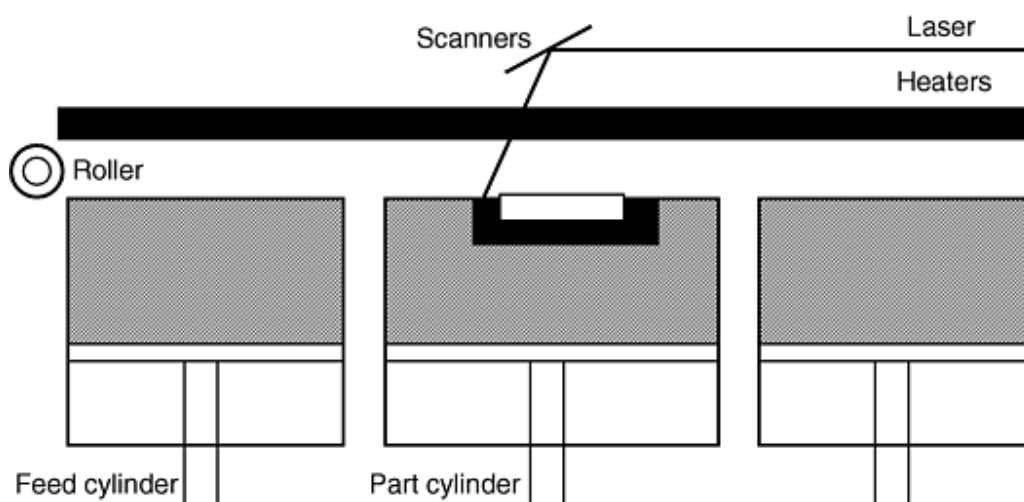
Major hardware components of selected laser sintering equipment. Source: Ref 38
